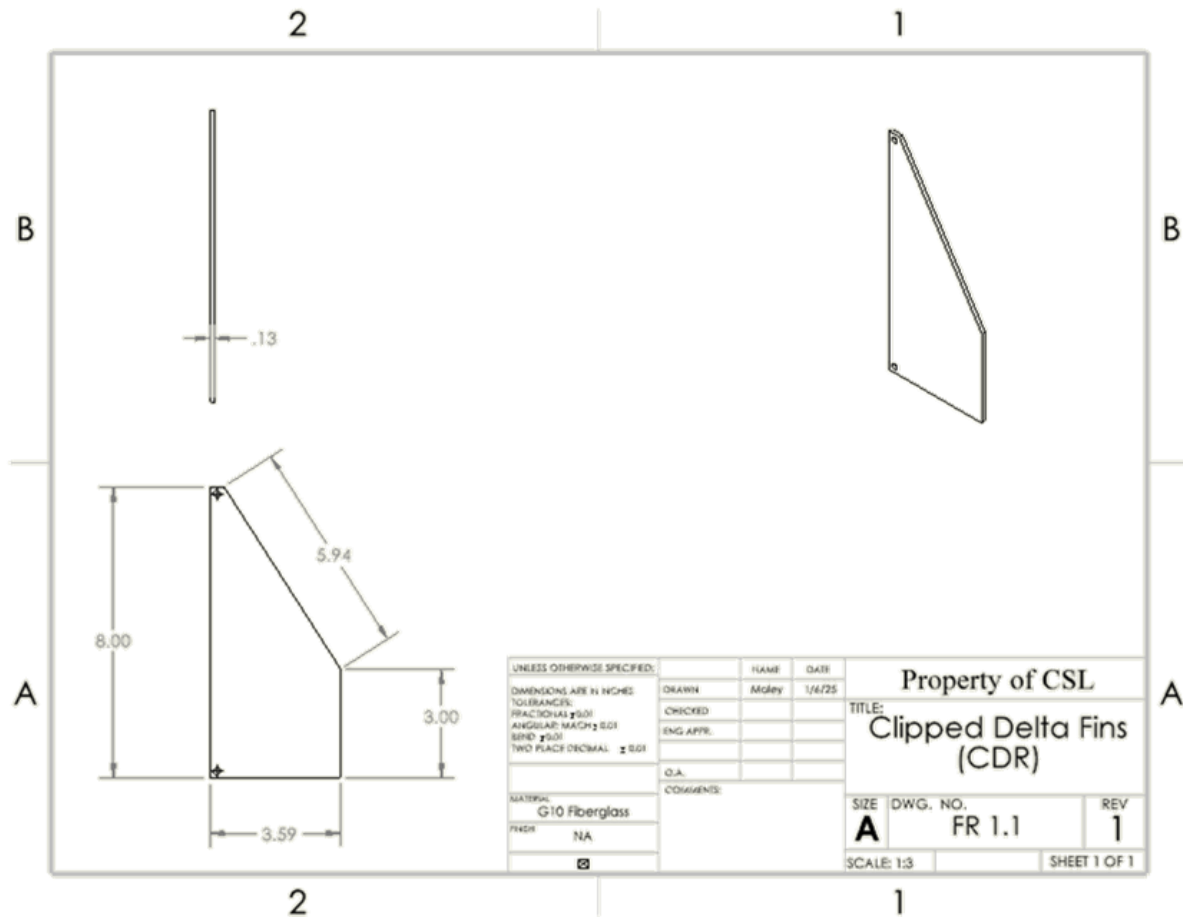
SolidWorks Drawing of Clipped Delta Fins.
